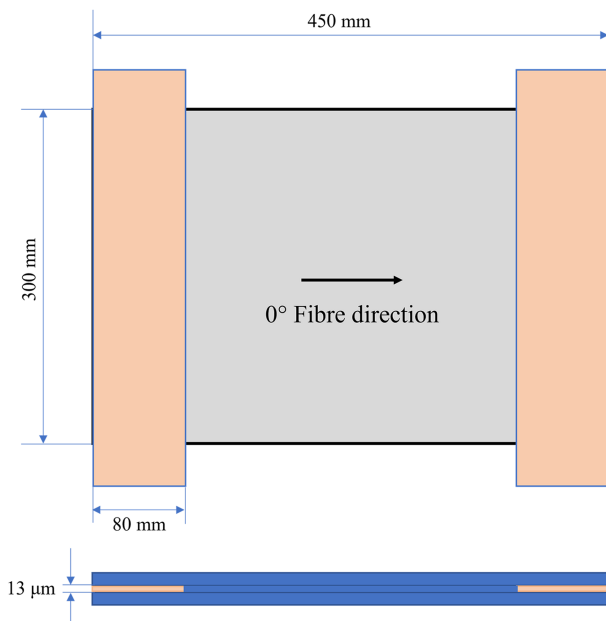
Panel to produce specimens for fracture mechanics tests. [Colour figure can be viewed at wileyonlinelibrary.com]
